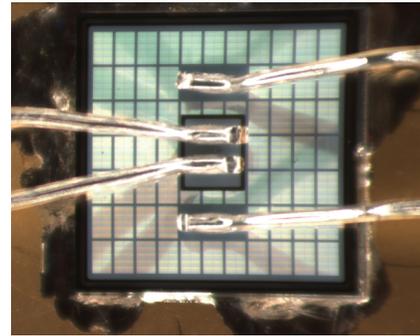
A 0.19 cm² area VJFET soldered into a package and wire bonded using 10 mil thickness aluminium wires.
